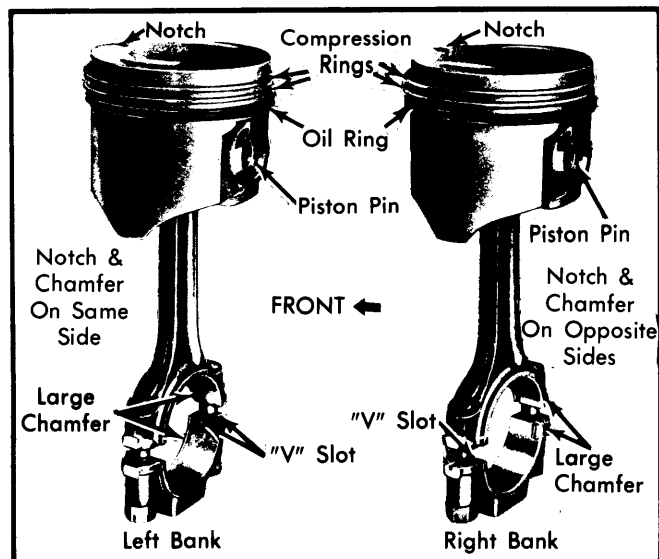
Precautions for Assembling Piston to Connecting Rod
